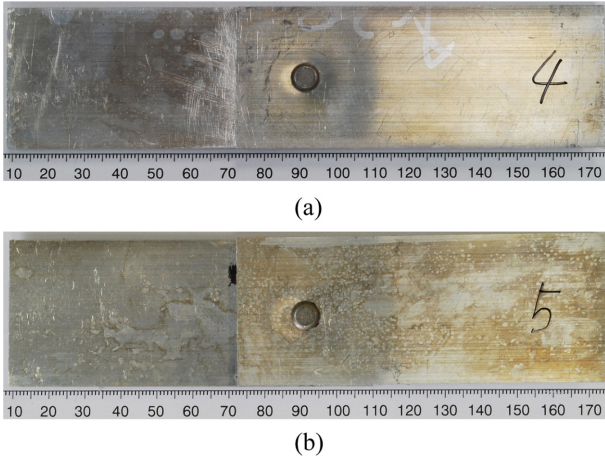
Specimen configuration: (a) SPR joint, (b) Hybrid joint
